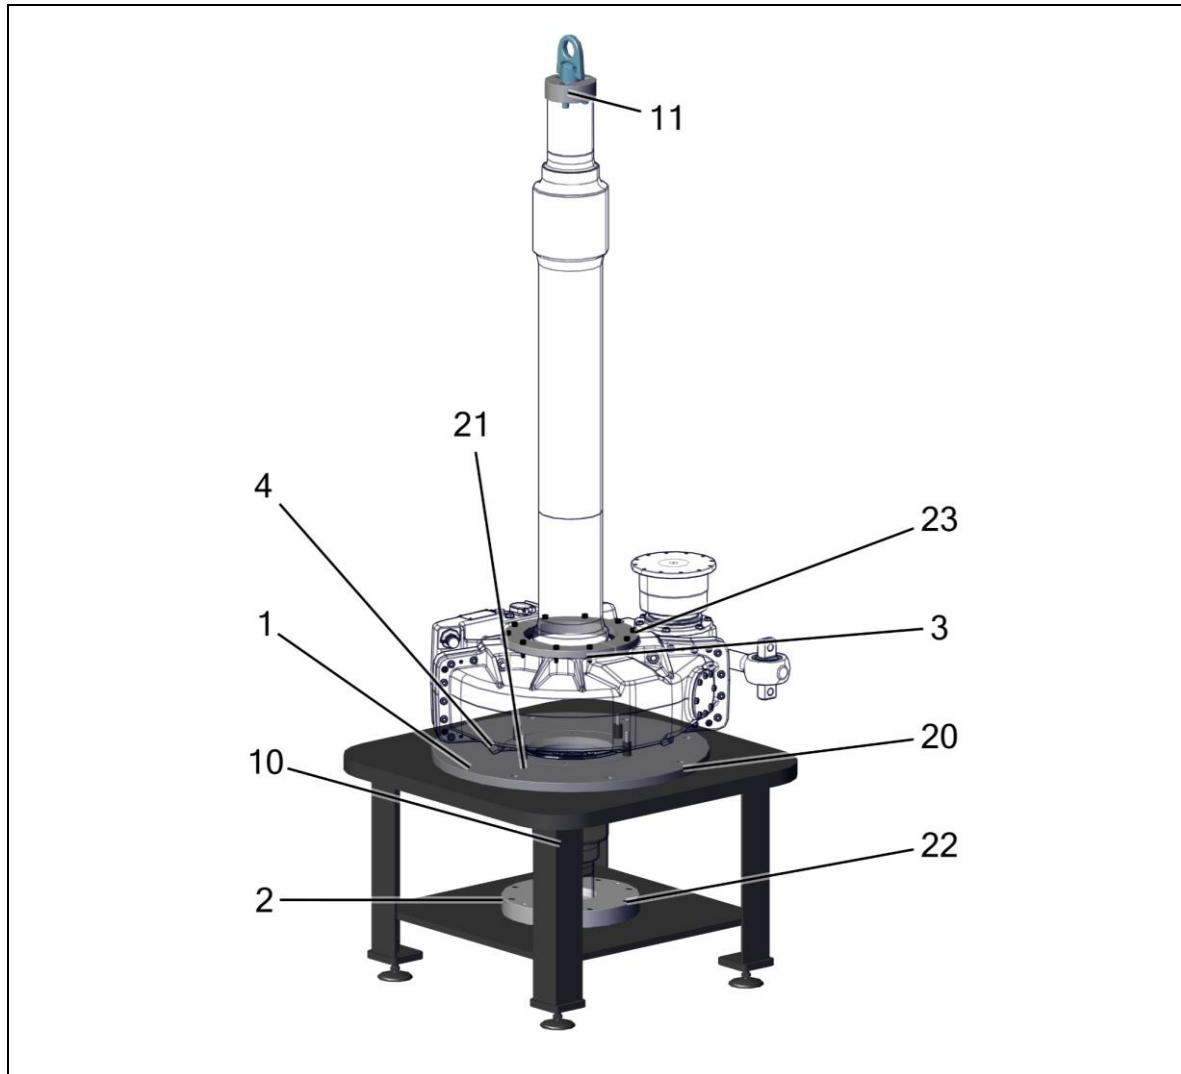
Adapter – measuring bearing clearance - AAV003023R0001 – T8
